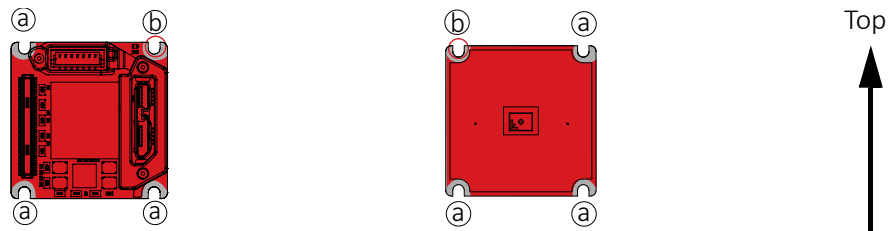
Mounting area of Alvium USB bare board cameras connector side (left); sensor side (right)
